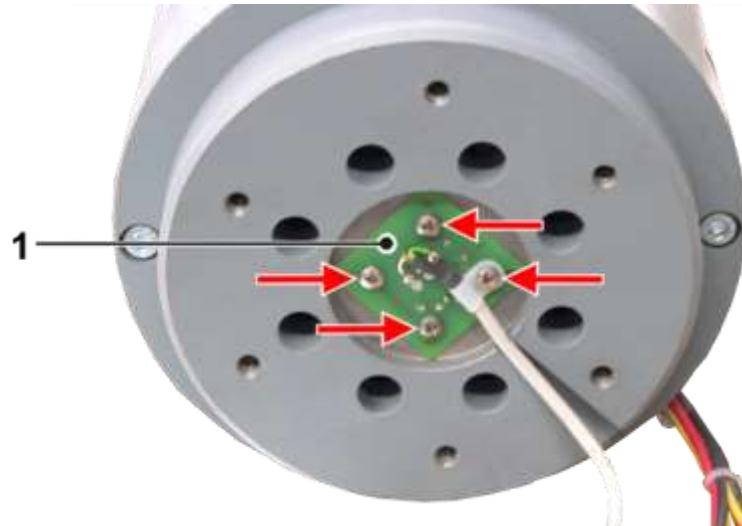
Position of the fastening screws of the speed encoder circuit board
